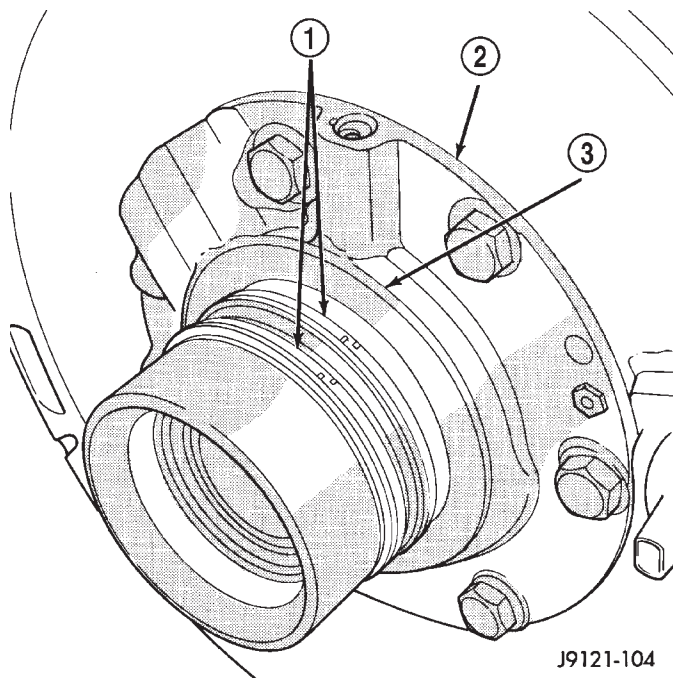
Reaction Shaft Seal Ring And Thrust Washer
